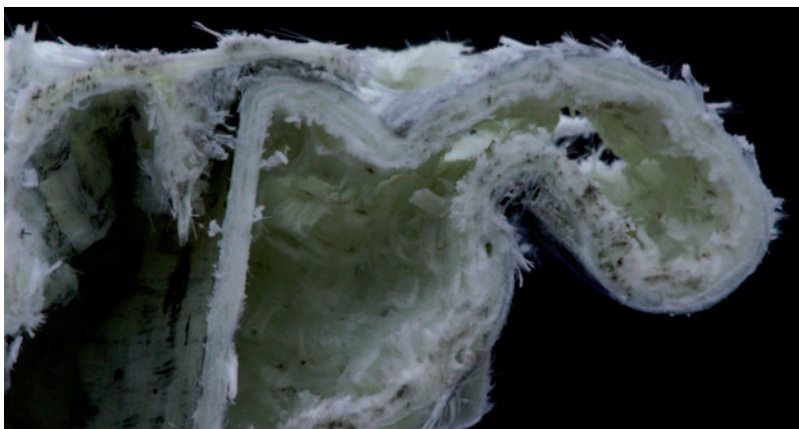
Debris plug and material inversion of Twintex tube during 45° chamfer initiated test.
